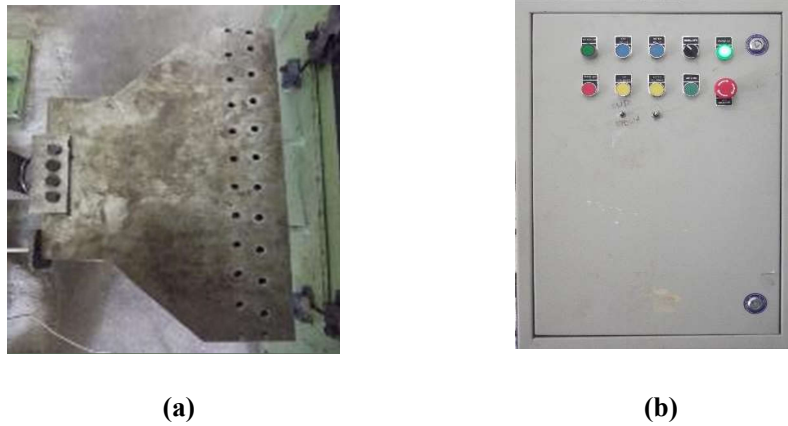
(a) Closer view of clamping plate (b) Control panel
